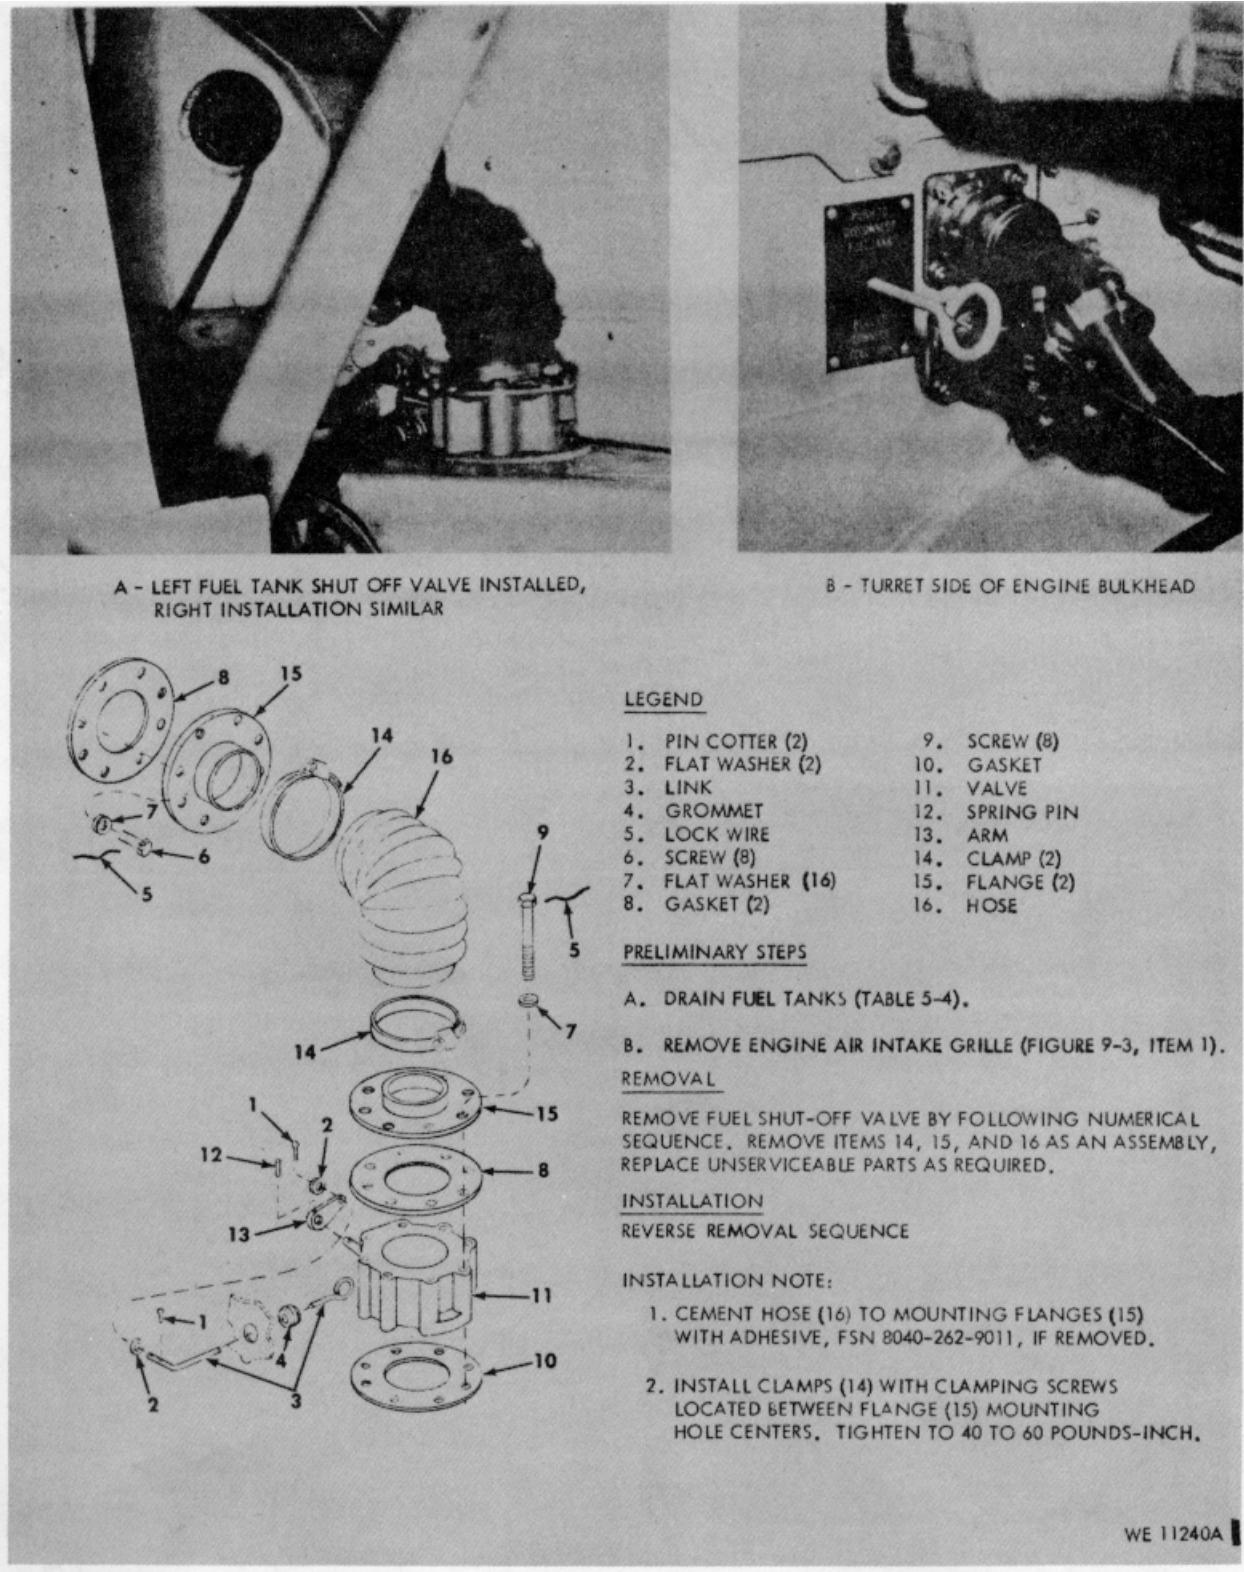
(Superseded) Removal/installation - fuel tank shut-off valves
